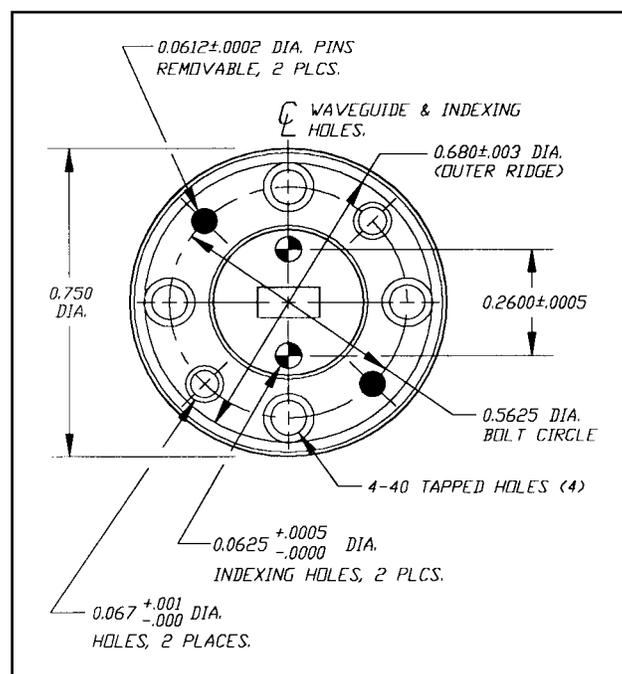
MPF15 and MPF12 flanges will mate with appropriate UG flanges. 0.0612 pins are removable for mating with other precision MPF flanges.
